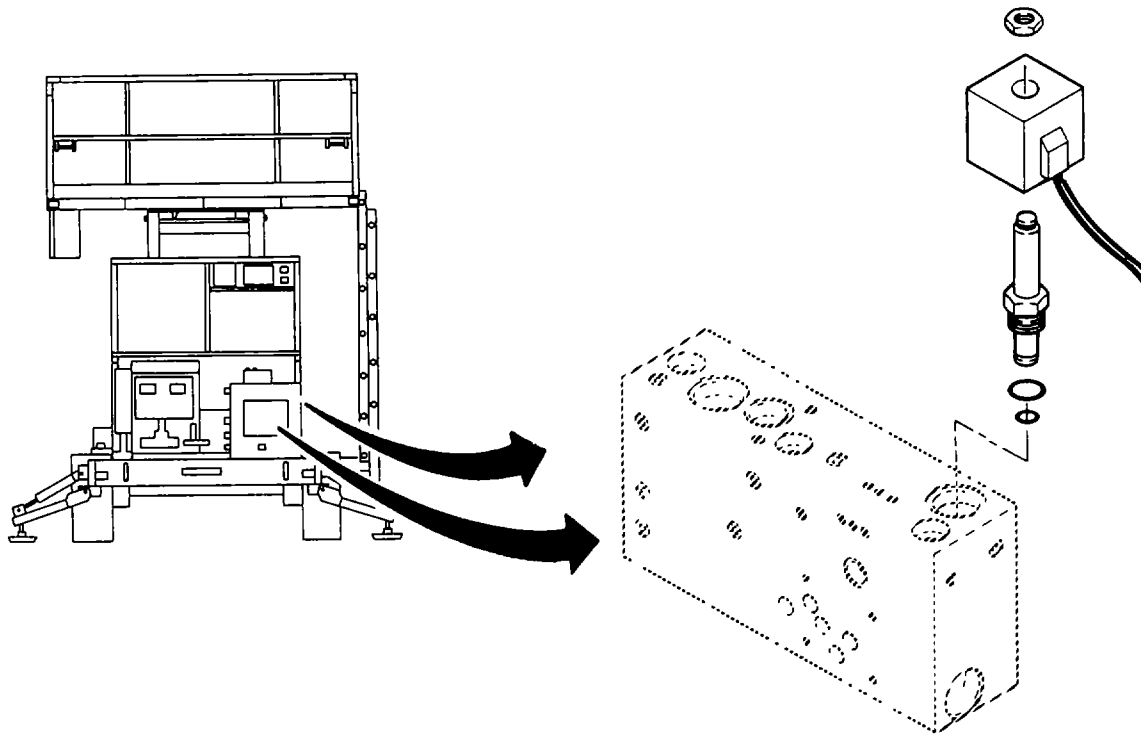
Solenoid Valve/Cartridge Assembly (Sheet 1 of 2).
